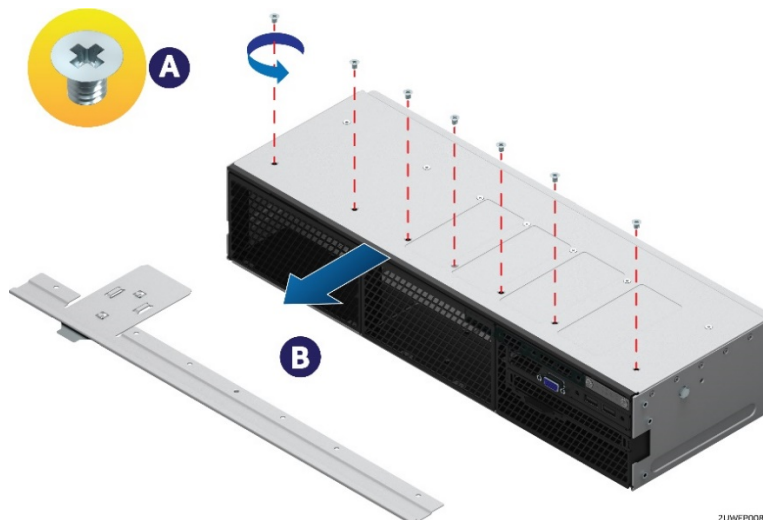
R2000WFxxx Drive Bay Retention Bracket Removal
